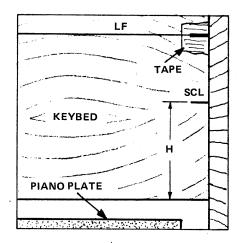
Measure dimension H, mark and label the Keybed as shown.
